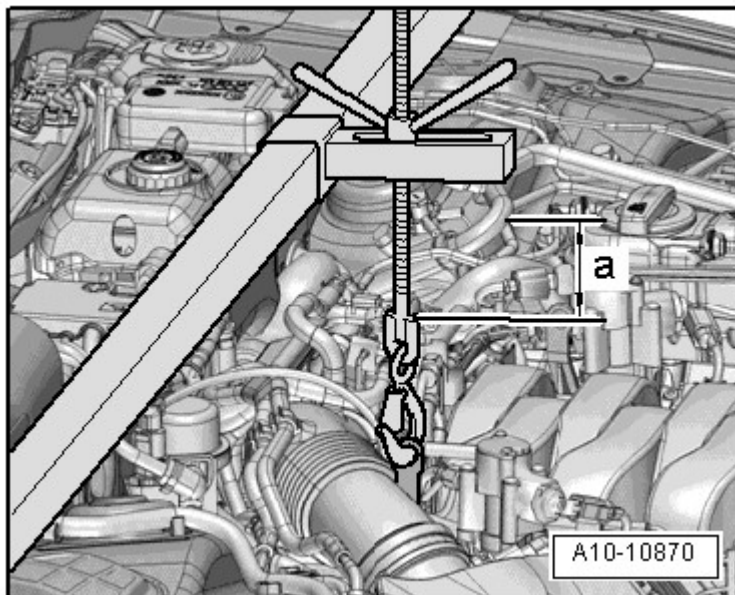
Raising Engine By Dimension Using Spindle 10 - 222 A /11
